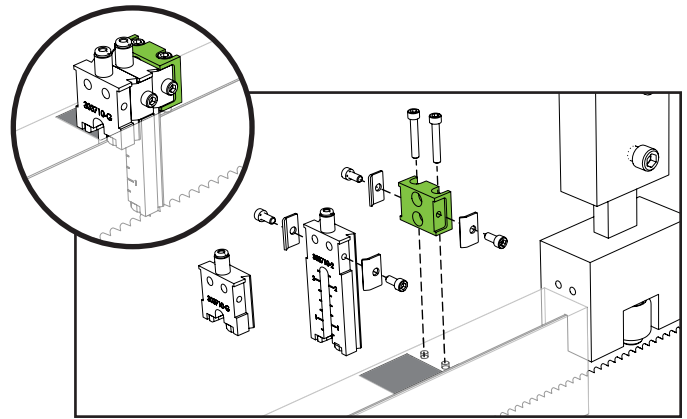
Mounting the Band Saw Blade and Band Saw Guide Nozzle to the blade guard using the block mount option
